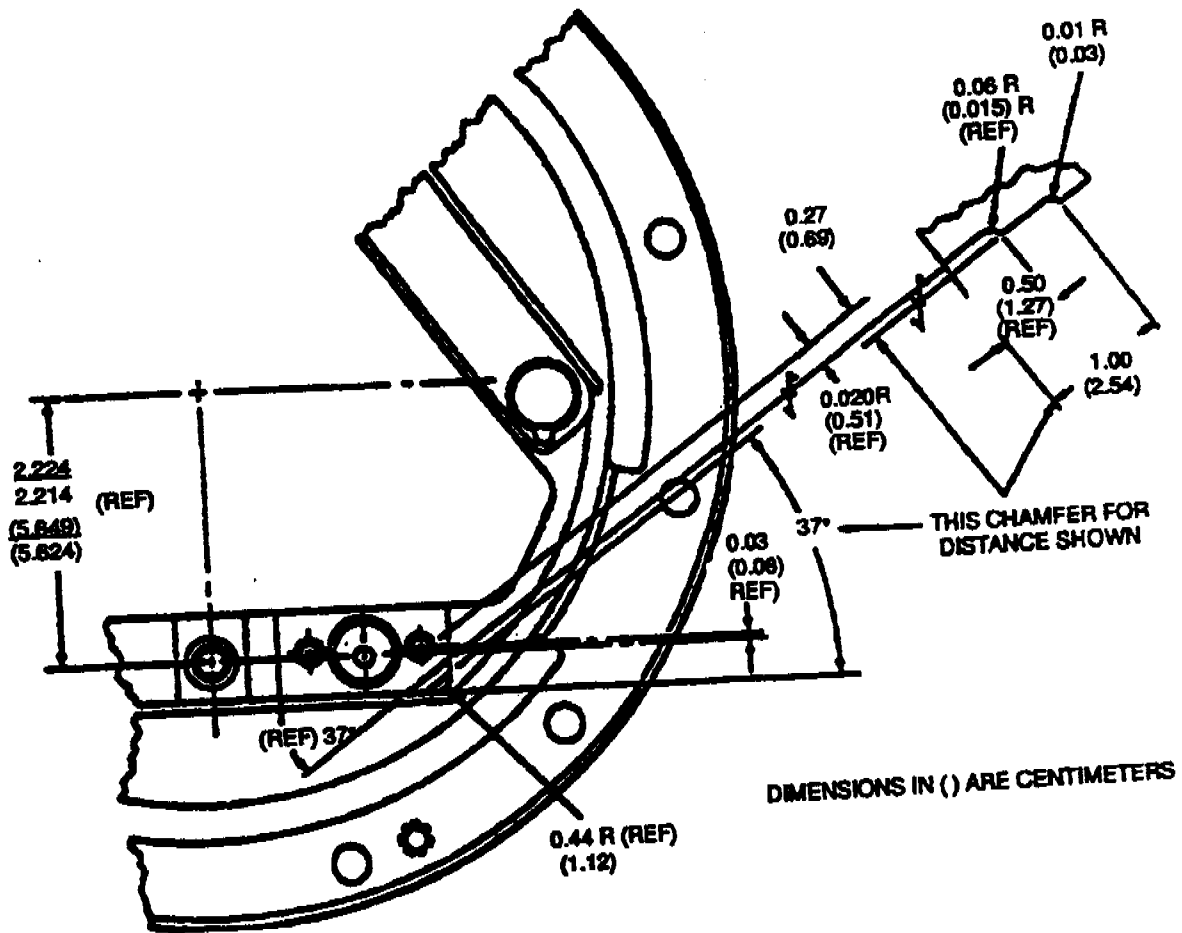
Rework of Accessory Drive Carrier and Cap Assembly.
